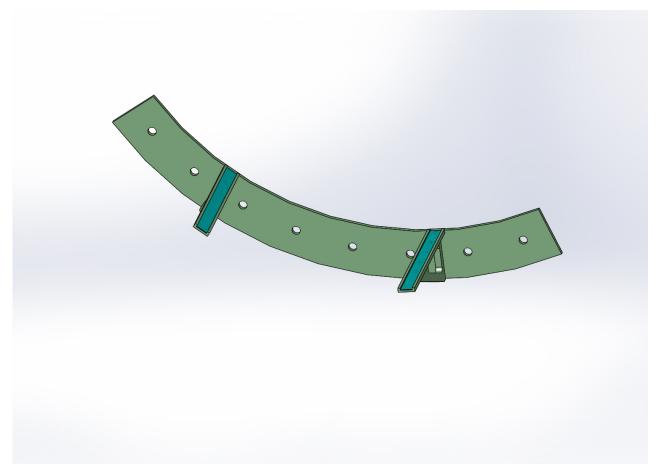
D1300379 aLIGO Pcal Tooling, Periscope Installation Entry Pad Assembly
